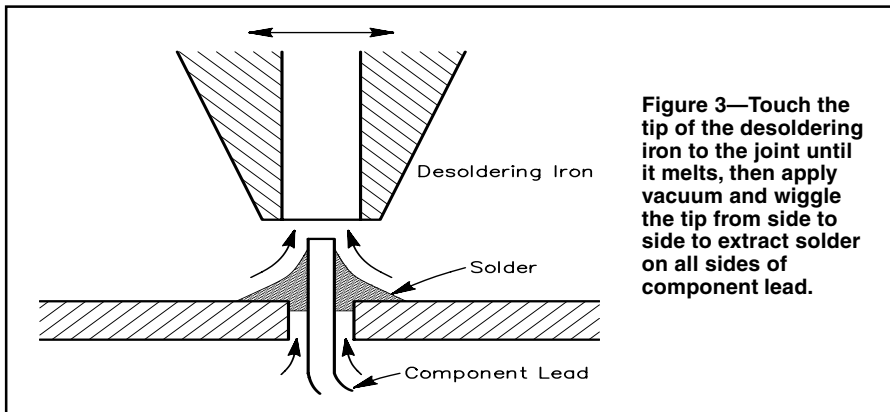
Touch the tip of the desoldering iron to the joint until it melts, then apply vacuum and wiggle the tip from side to side to extract solder on all sides of component lead.
